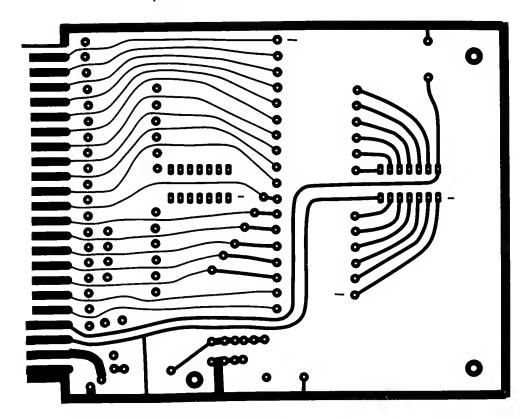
(b). General Circuit Test Board Printed Circuit Layout.
